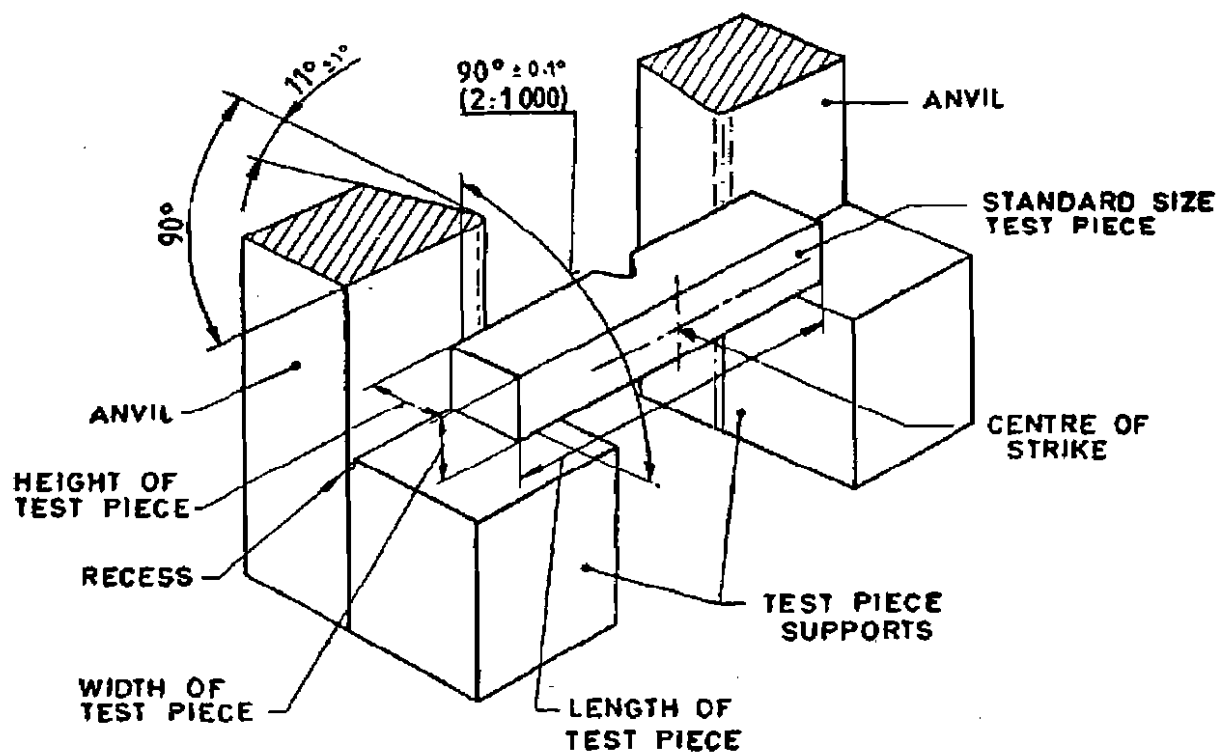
CONFIGURATION OF TEST PIECE SUPPORTS AND ANVILS
